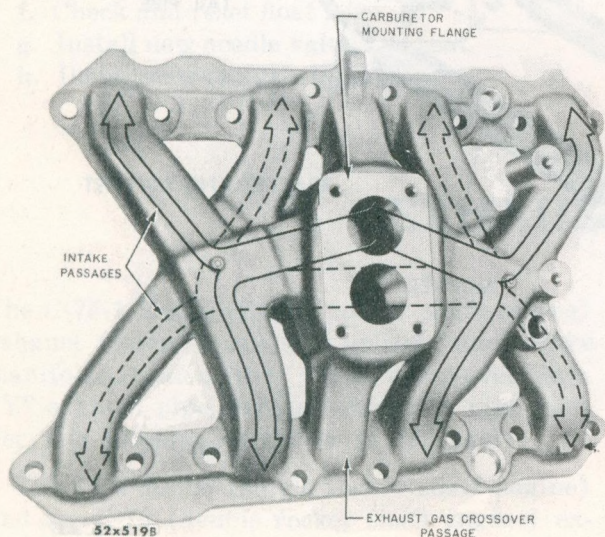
Intake Manifold (Single Rocker Shaft Engine)
